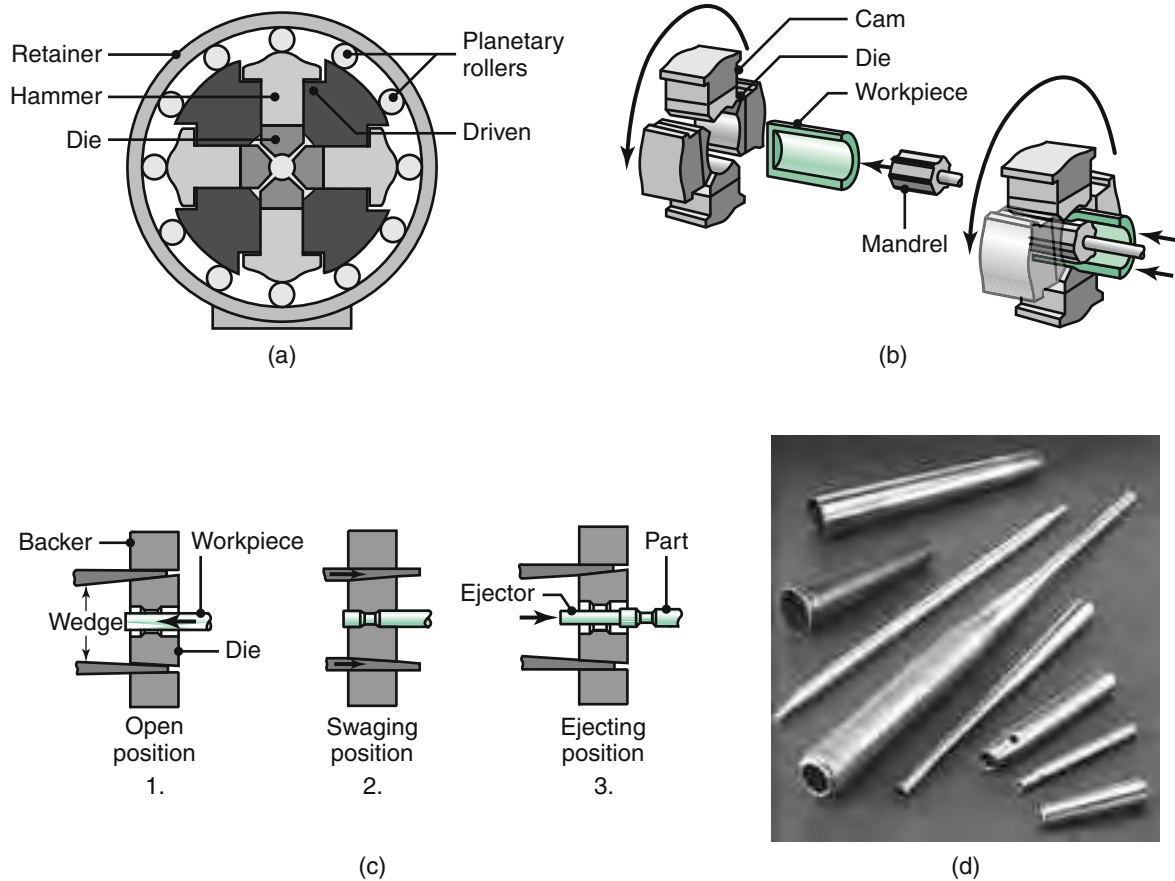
(a) Schematic illustration of the rotary-swaging process. (b) Forming internal profiles on a tubular workpiece by swaging. (c) A die-closing swaging machine, showing forming of a stepped shaft. (d) Typical parts made by swaging. *Source:* (d) Courtesy of J. Richard Industries.
